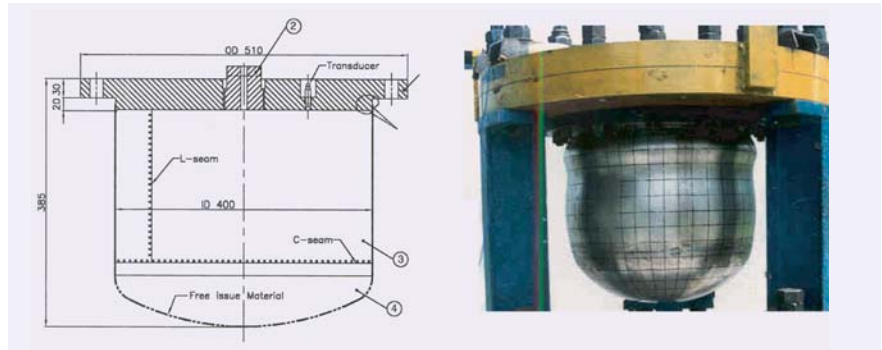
Dimension details of a typical TRIG-2 test vessel and test setup
